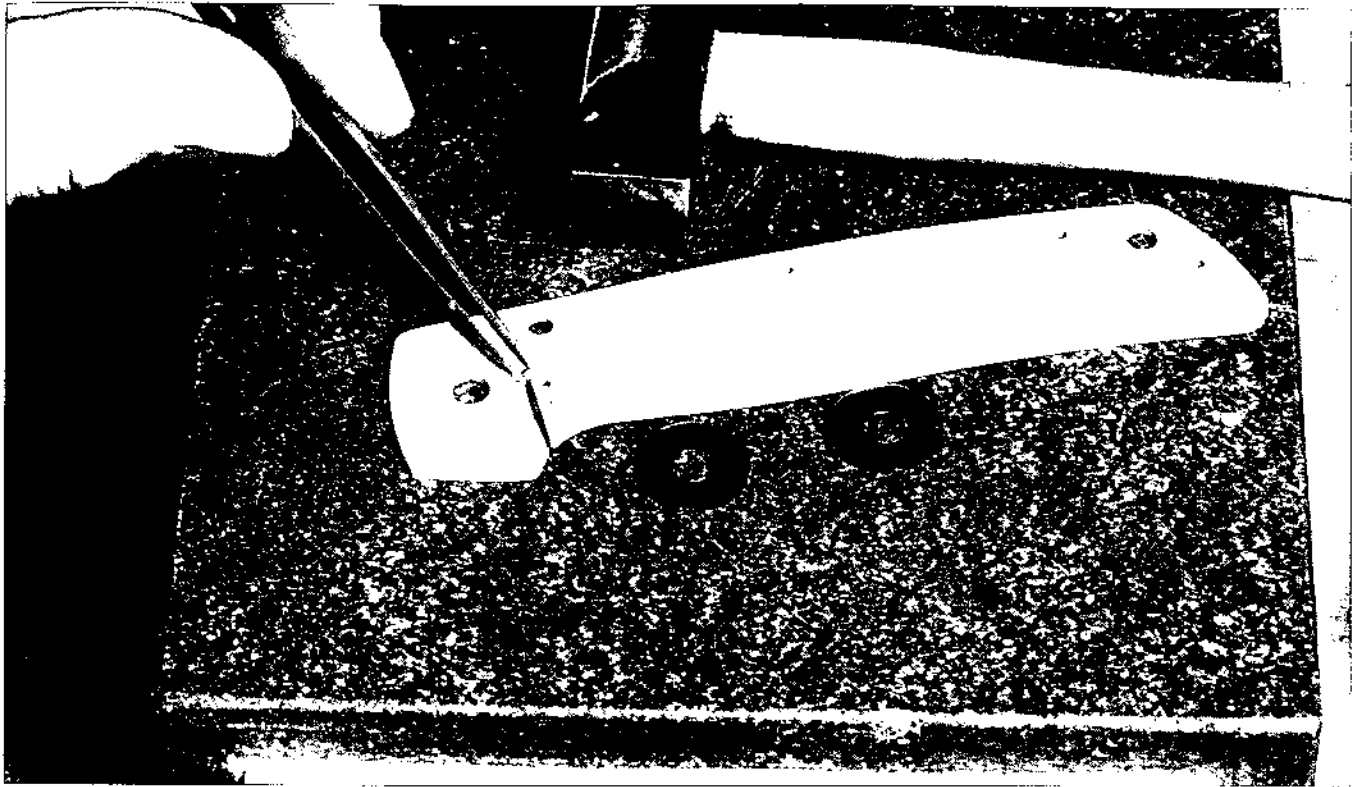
The pivot hole is formed into a "D" with a rounded punch on the staking plate.
